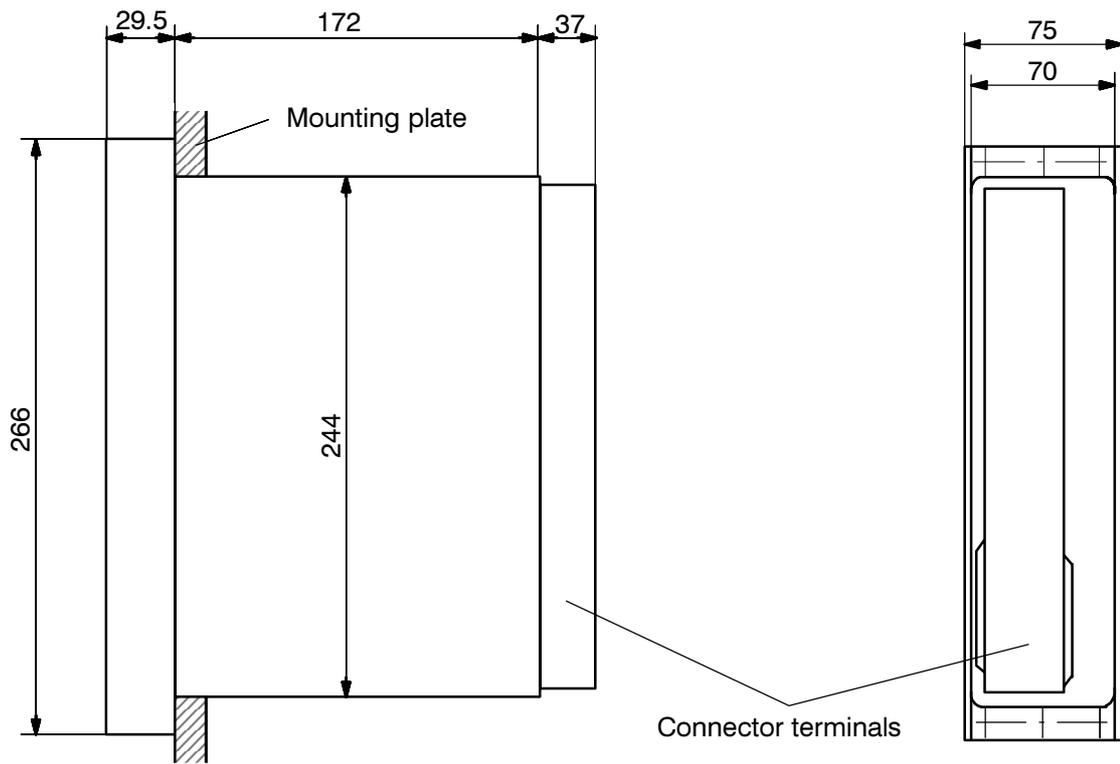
Dimensions of controller unit, type 7XT7100-0BA00 for panel surface mounting with terminals at both sides
